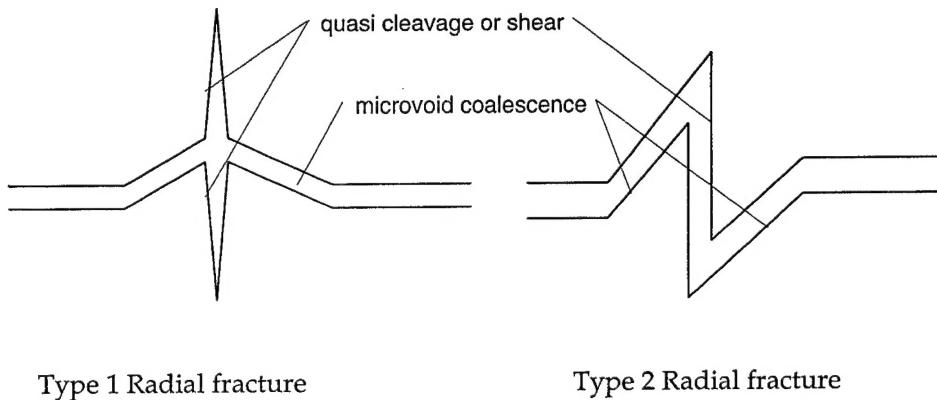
The two types of radial fracture, after Larson and Carr [2].
